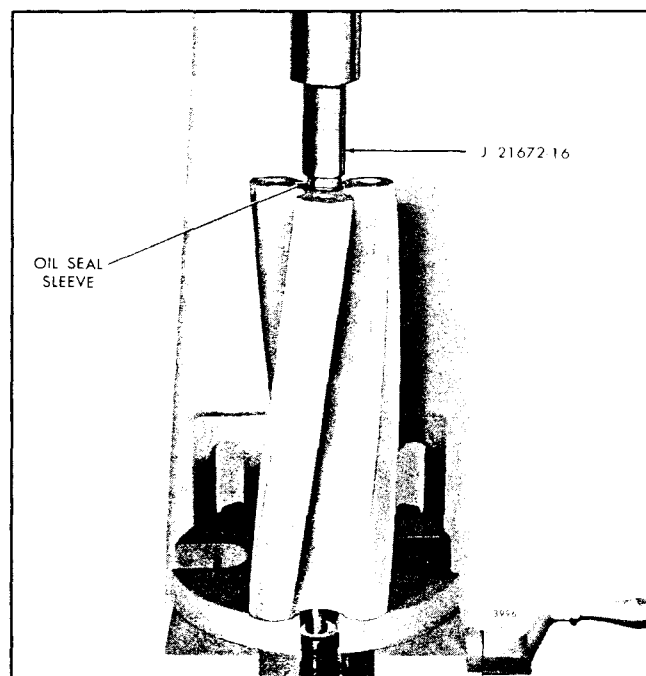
Installing Oil Seal Sleeve on Rotor
